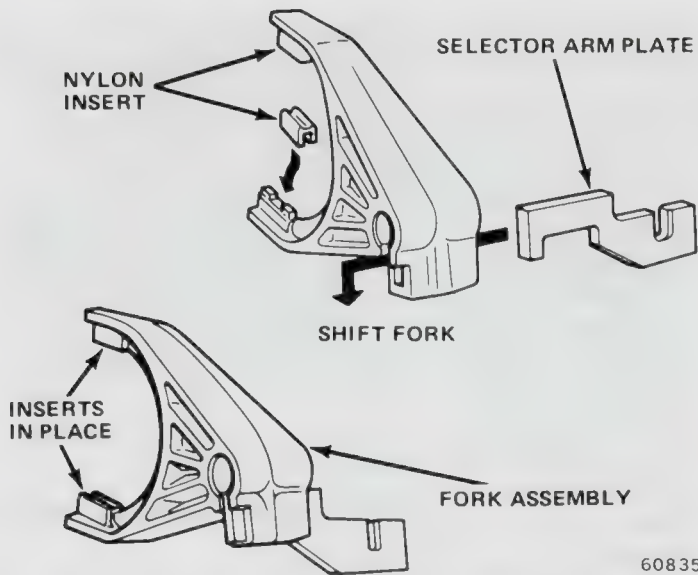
B-35 Assembling Shift Forks and Selector Arm Plates
